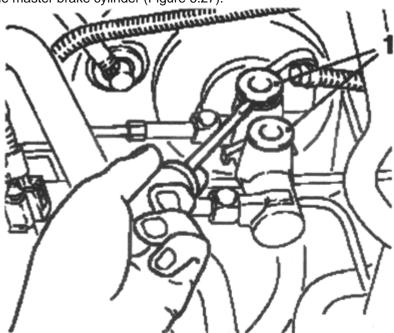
Replacement Seal on main brake Cylinder: 1 - Seal
